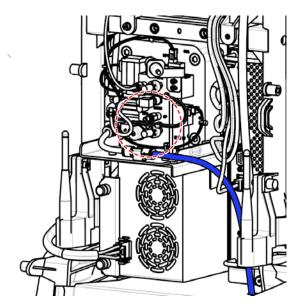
Pneumatic Tubing Connecting Pneumatic Manifold and Vit Pump
